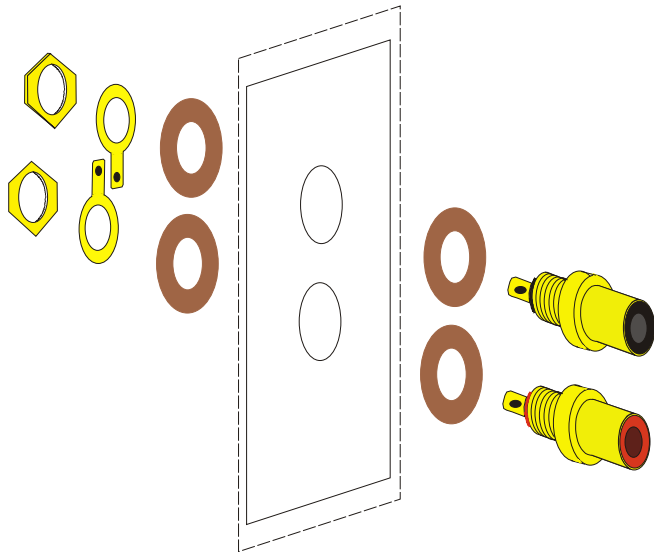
EXPLODED VIEW OF HOW TO FIT THE BINDING POSTS
